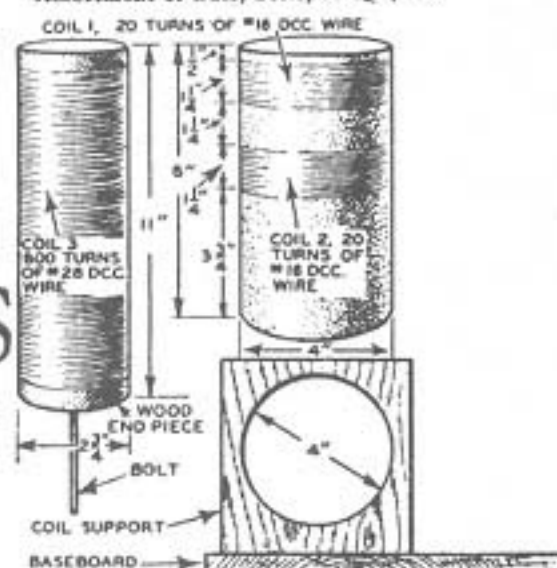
Here is a side view of the vacuum tube Tesla coil, showing the layout of parts on a baseboard. For higher power, an additional tube may be used, wired up in parallel with the 210 tube. yet will provide plenty of sure fire fun and spectacular results. It makes use of many
